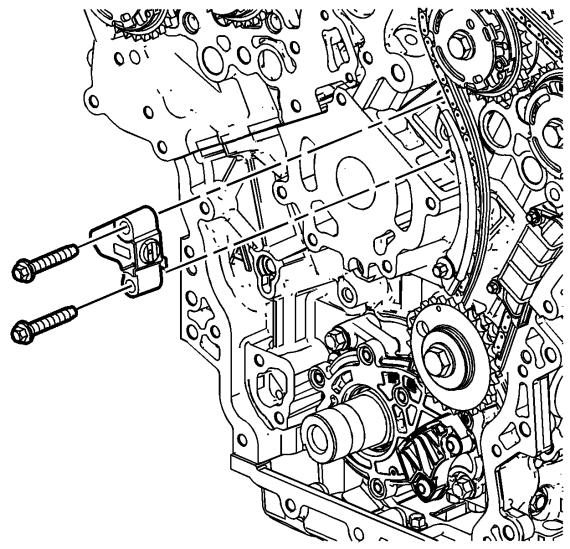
Location Of Left Bank Secondary Camshaft Drive Chain Tensioner Courtesy of GENERAL MOTORS COMPANY
